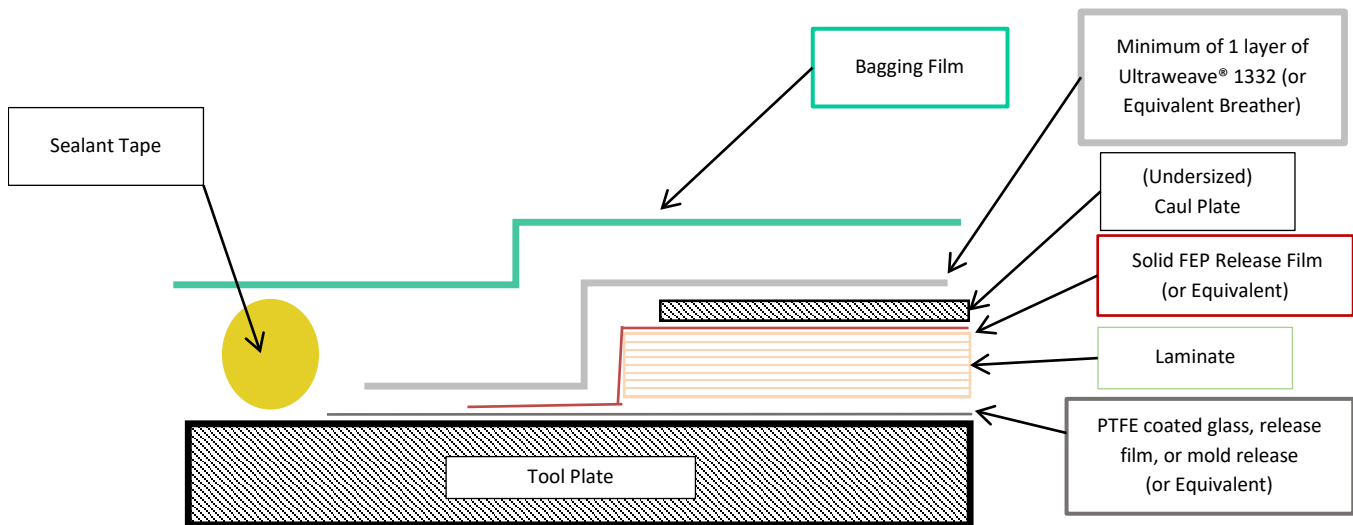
shows the bagging arrangement which will be used for the manufacture of
